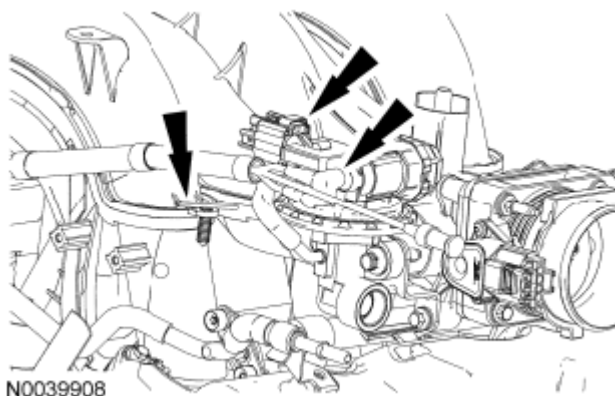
Locating EGR System Module Vacuum Hose And Electrical Connector
